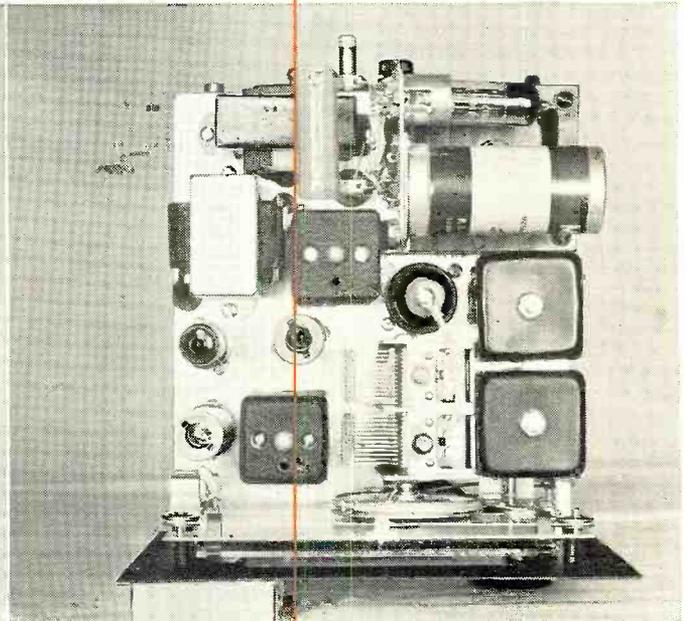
Top chassis view of the completed receiver showing the location of components. Careful parts placement is required.
